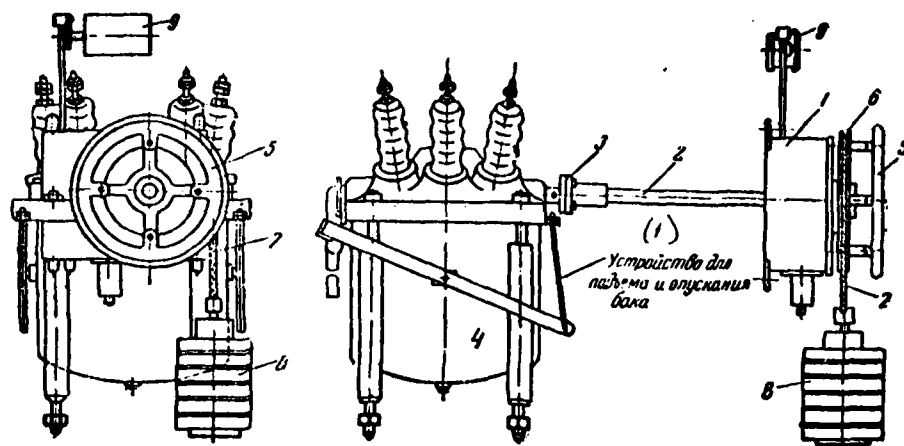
Installation of manual cargo drive of the type PG-10 on an oil breaker of the type VMB-10.
